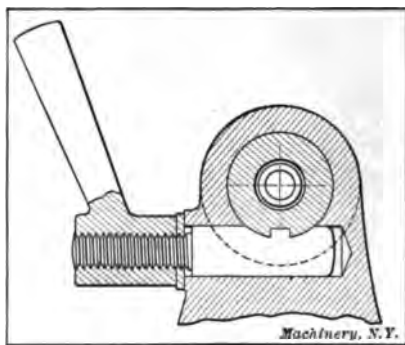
Clamping Bolt for Poppet or Tailstock Spindle
